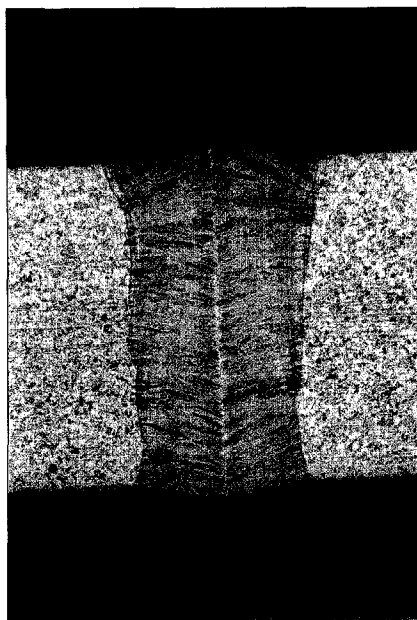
DILAS and the Fraunhofer Institute of Laser Technology (ILT) of Aachen have demonstrated deep penetration welding with a multi-kW diode laser.
